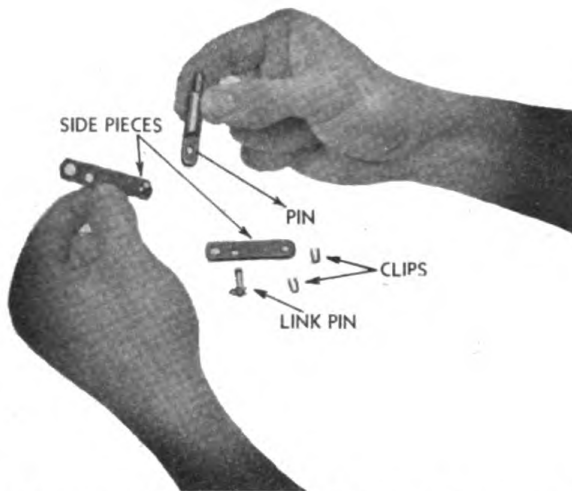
Assembling Pin and Side Pieces of Link Assembly.
